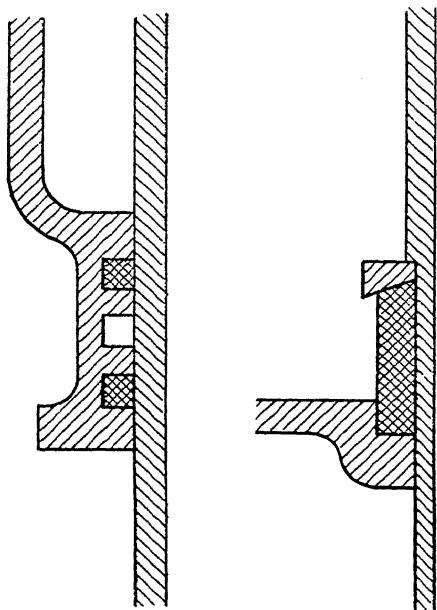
METHODS OF SEALING WATER JACKET FROM CRANKCASE IN WET LINER ASSEMBLY
